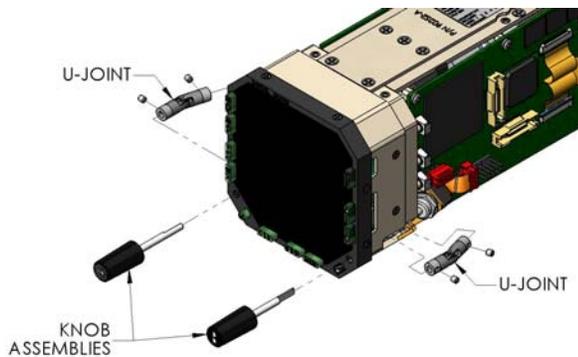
Remove Heading and Course Knobs thru front of bezel, disengage U-Joints from Encoder Shafts and remove from unit.
